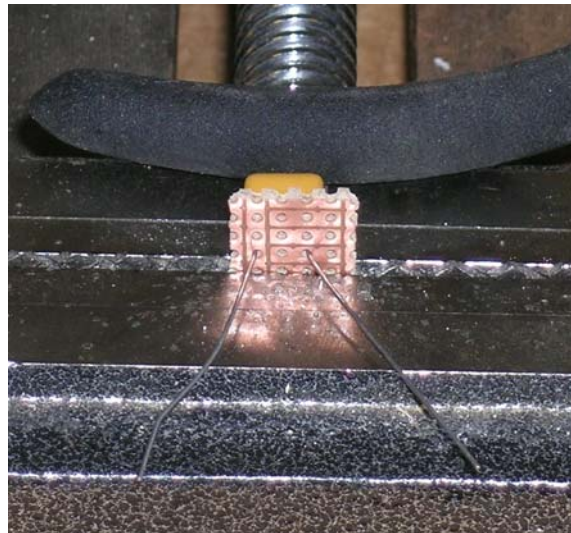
Arrangement of Sensing Circuit Capacitor Before Soldering
